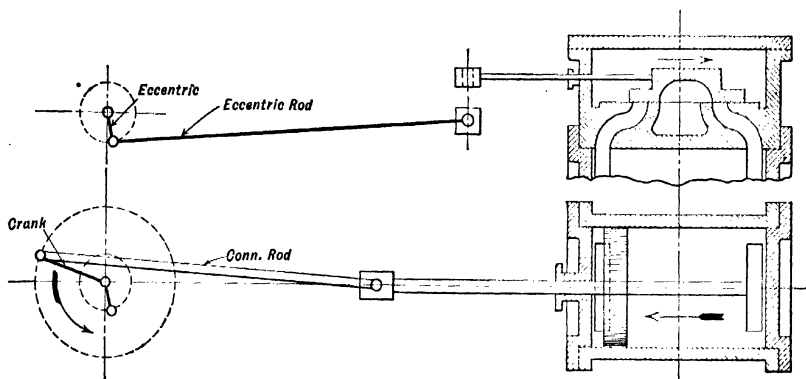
Positions of Crank and Eccentric at Point of Head End Release.
